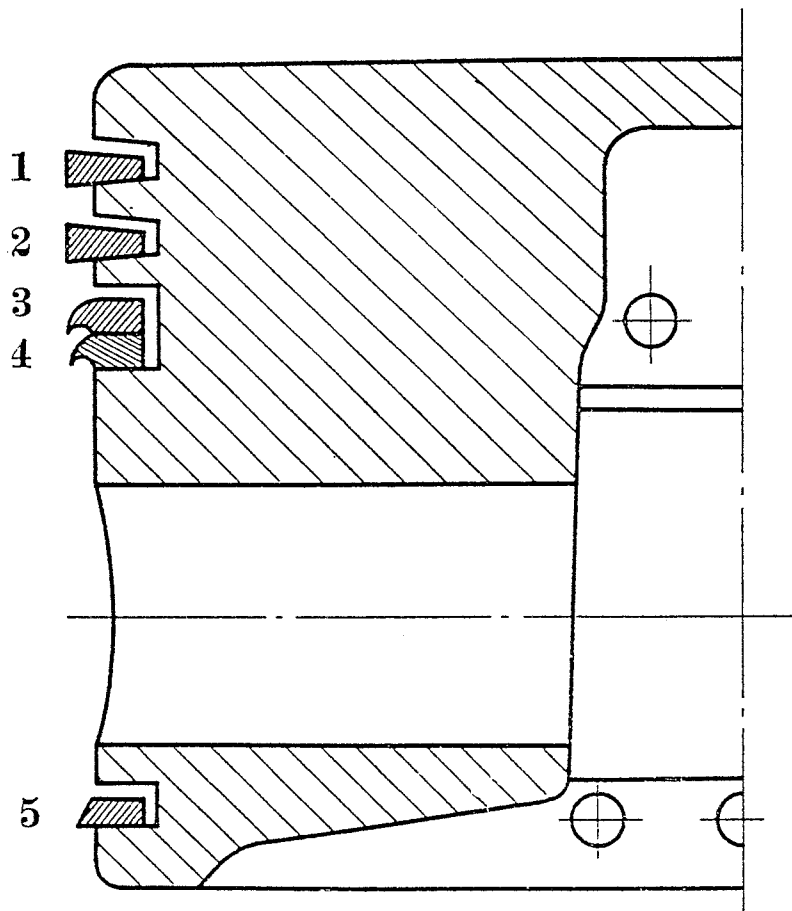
Mounting Scheme of the Piston Ring of Type-6A Piston Engine
